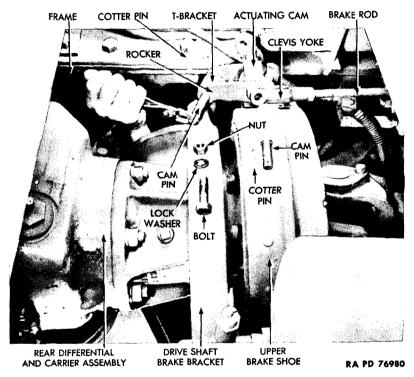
Disconnecting Drive Shaft Brake Rocker from T-bracket
